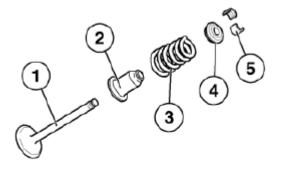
Identifying Colour-Coded Of Valve Spring Courtesy of BMW OF NORTH AMERICA, INC.
